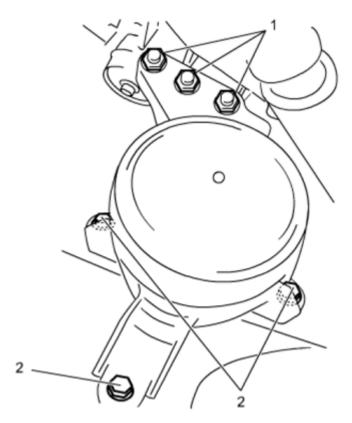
Identifying Engine Right Mounting Bracket Nuts And Bolts Courtesy of SUZUKI OF AMERICA CORP.
